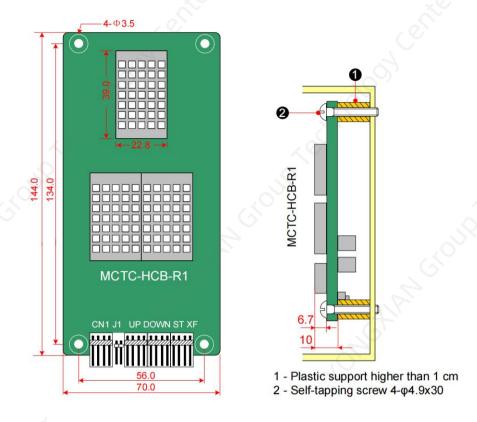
Appearance, dimensions, and installation method of MCTC-HCB-R1
